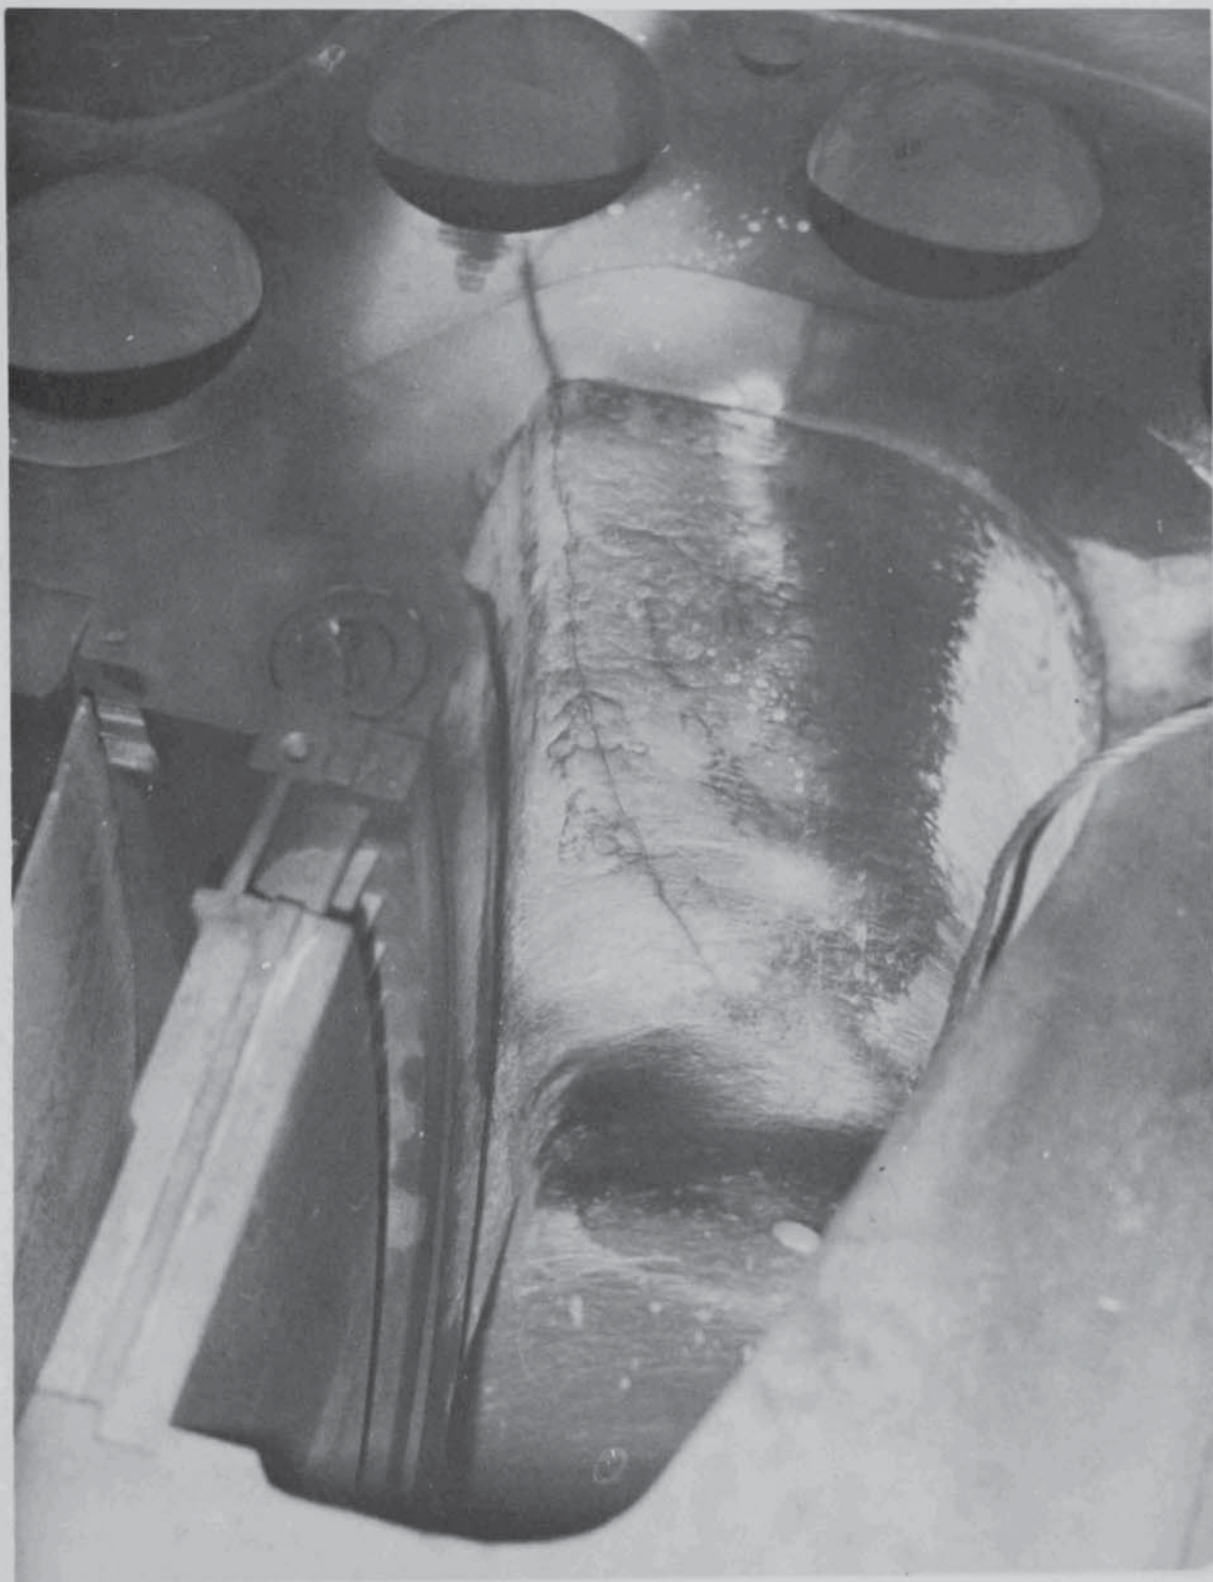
CRACK IN I.P. CASING INLET STEAM BELT
